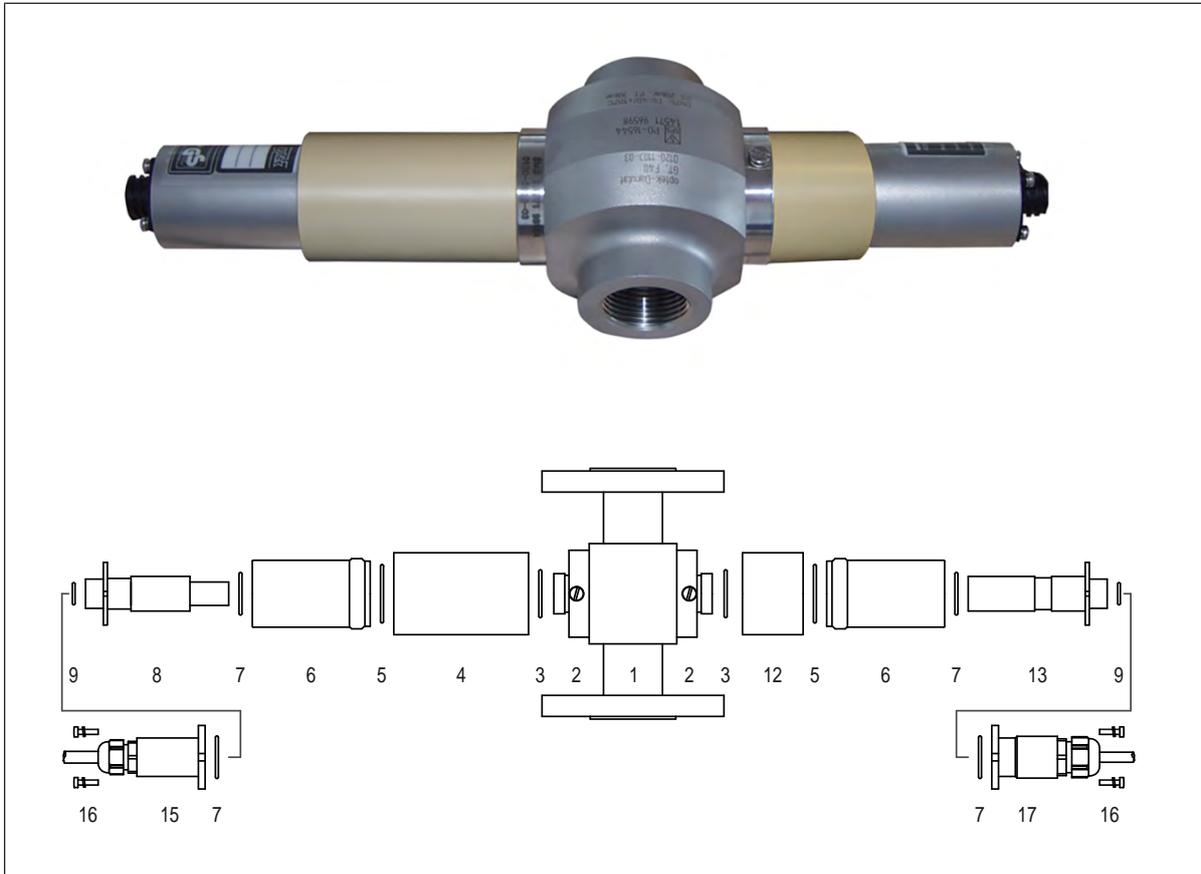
Photo and exploded view AF16-HT-F / AF16-HT-N
